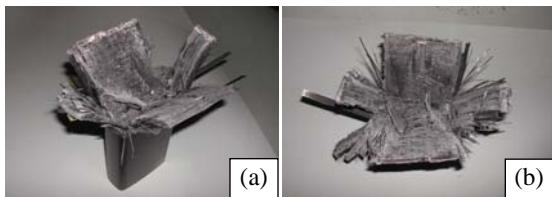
Photographs of impact tested rectangular CFRP tube: (a) isometric view; (b) top view
